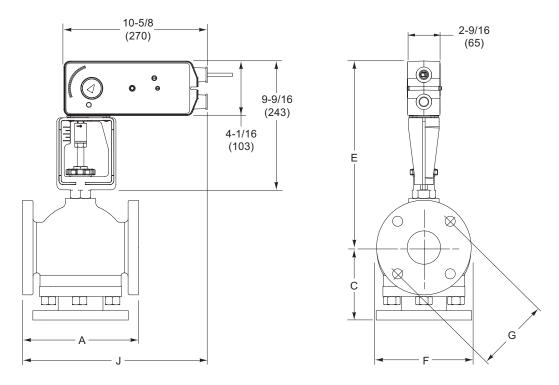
Mx61-720x with 21/2" to 4" 3-Way VB-9313 Flanged Globe Valve.
